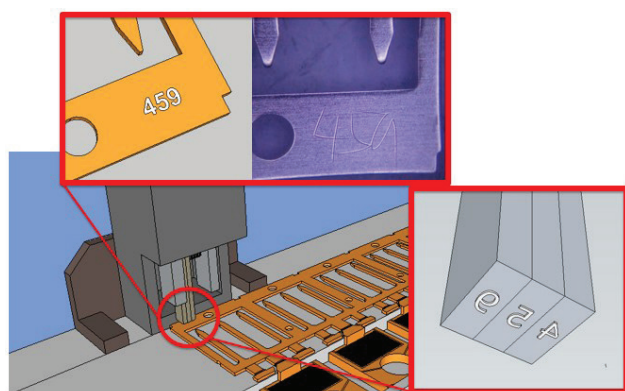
Stamper Tool and Sample Stamp on the Lead Frame
